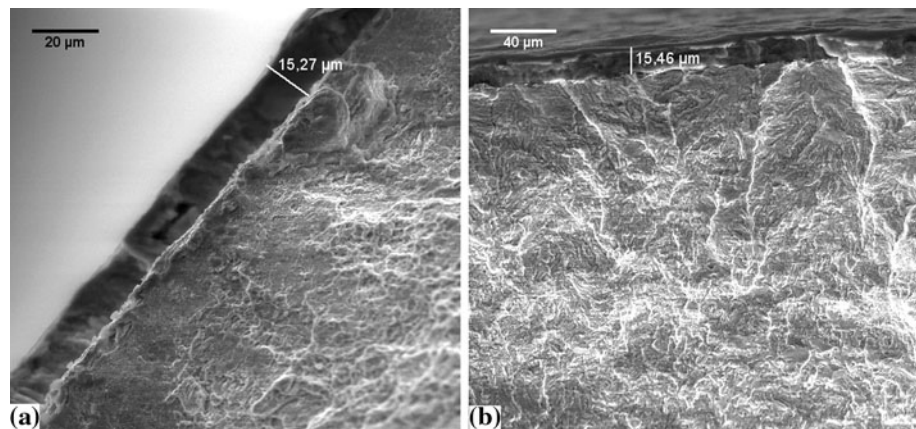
Fracture surface from a rotating bending fatigue test specimen. a $s_{\max} = 950$ MPa, b $s_{\max} = 1047$ MPa, 300 \times
